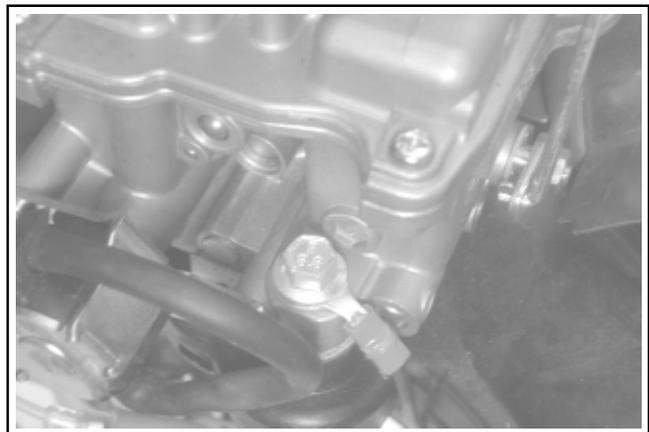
Ground Lead on Carburetor Mounting Screw.
